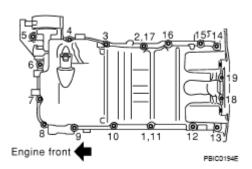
Identifying Transmission Joint Bolt Loosening Sequence Courtesy of NISSAN MOTOR CO., U.S.A.
